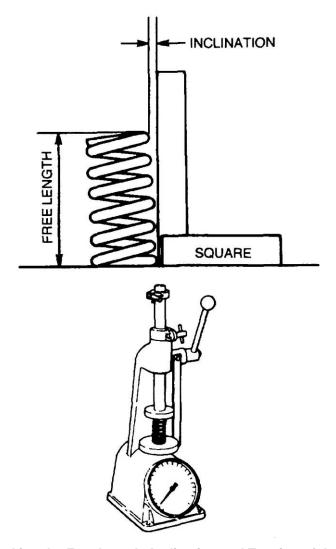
Checking the Free Length, Inclination and Tension of the Valve Springs
